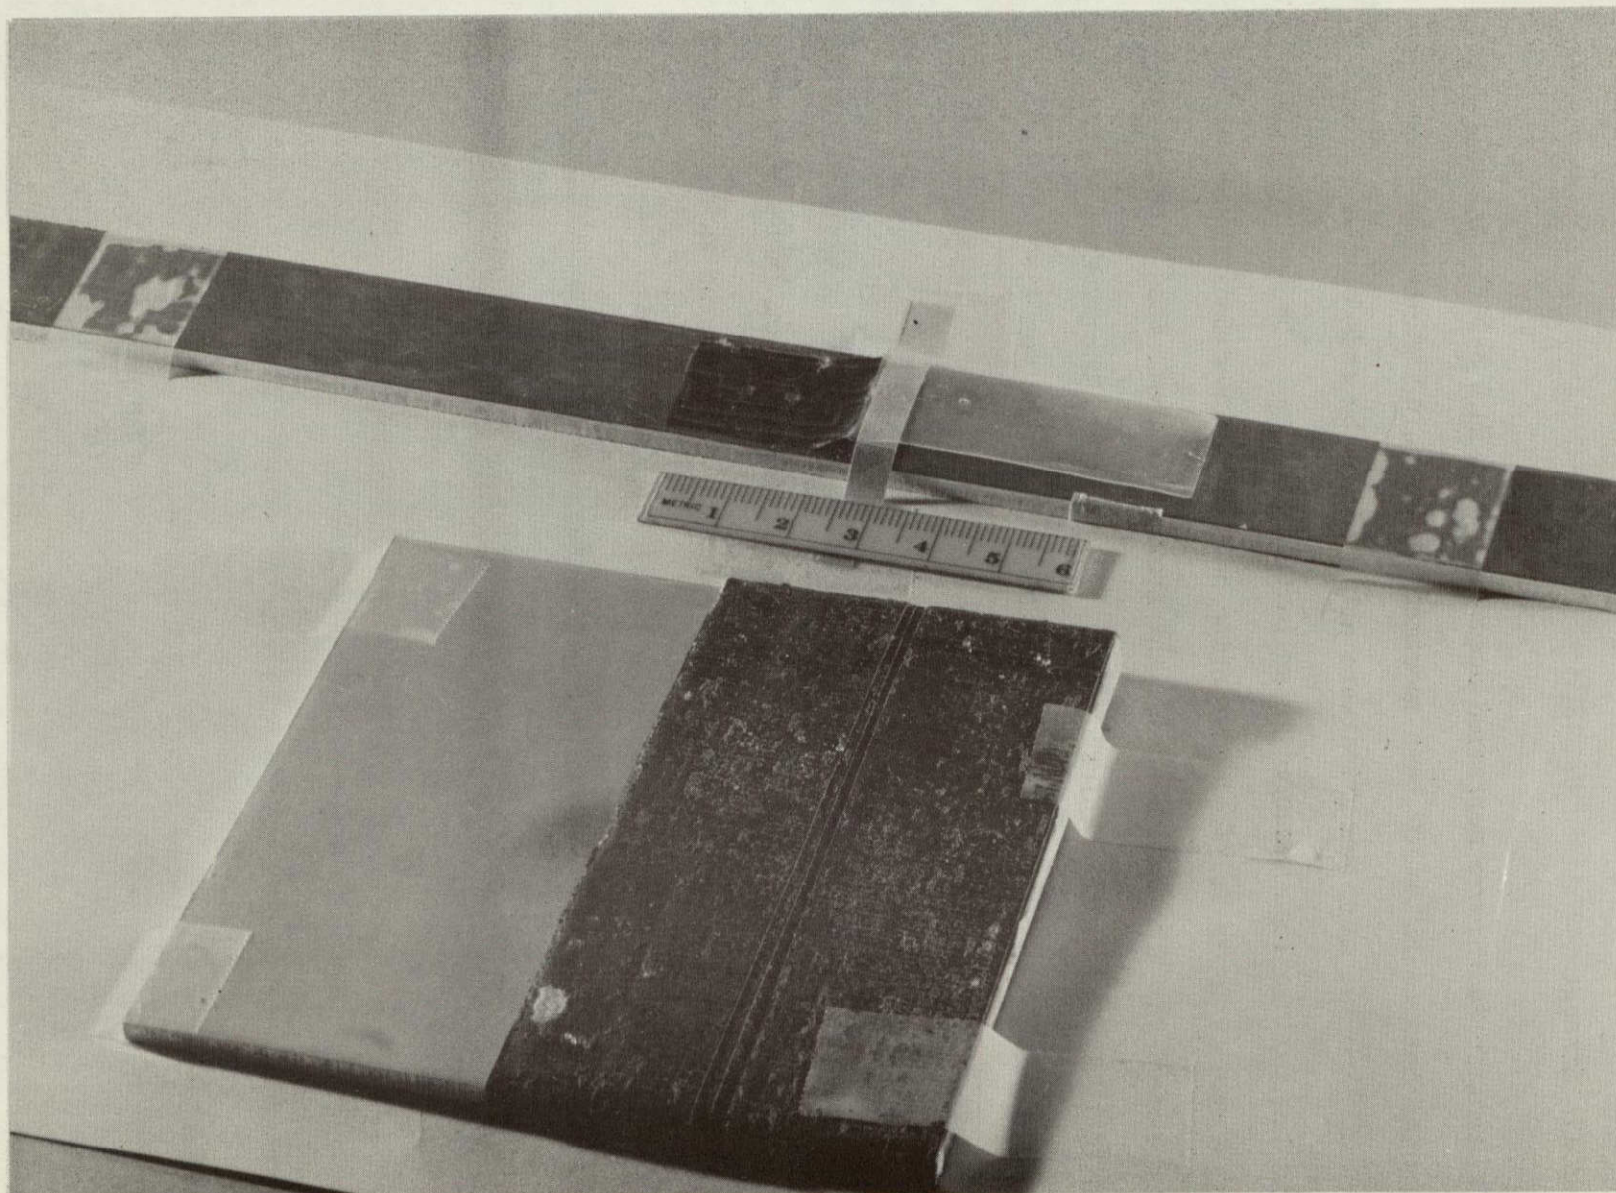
Photo of a Typical Adhesion Specimen After Testing.
